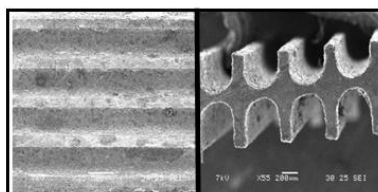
Top and side view of DL-MC fabricated by wire-cut EDM.
